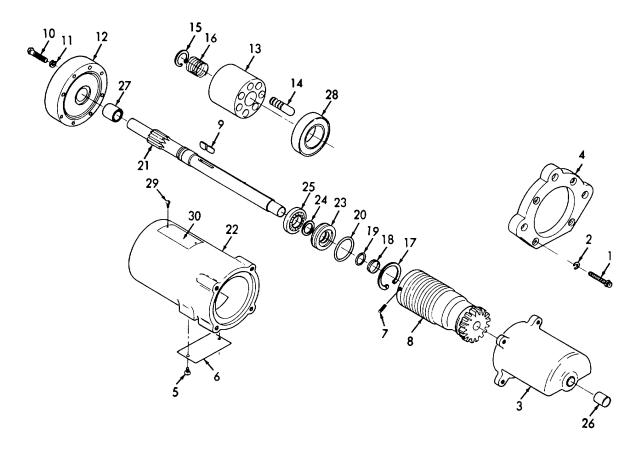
Cranking Motor, Disassembly/Reassembly.
